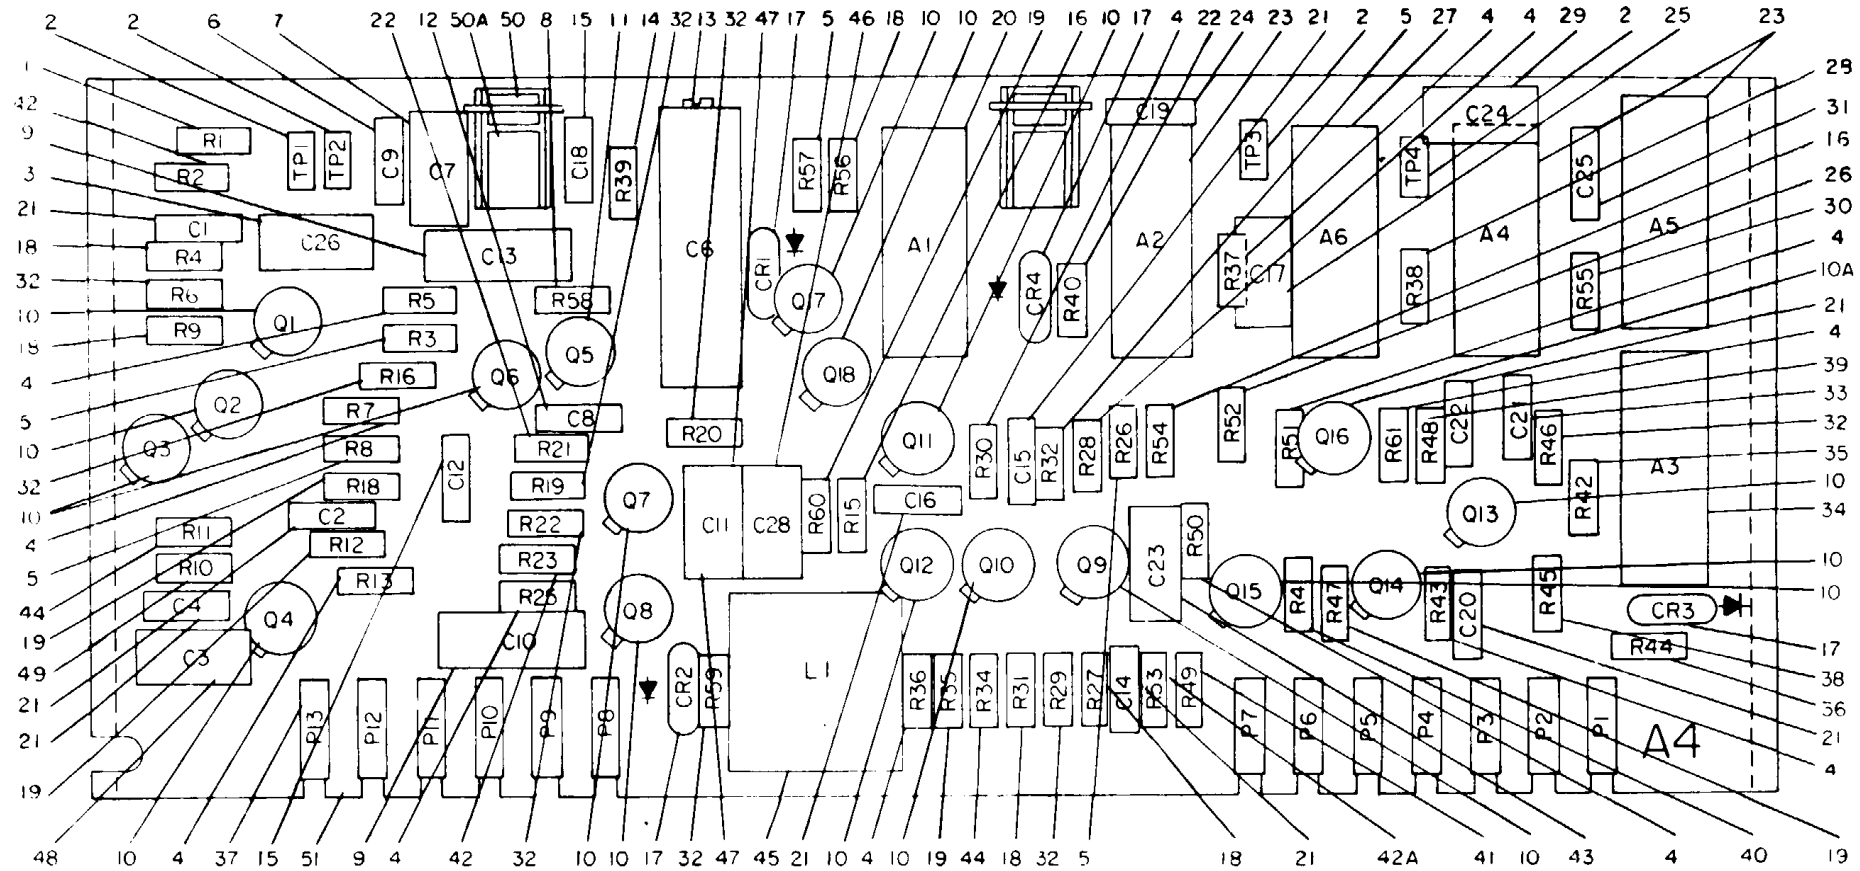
Comparator-Decoder Assembly (A4) (Code C) (Sheet 2 of 2)
